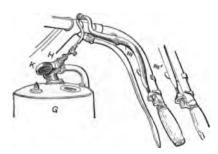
HANDLE BAR AND VALVE CONTROLLER.
